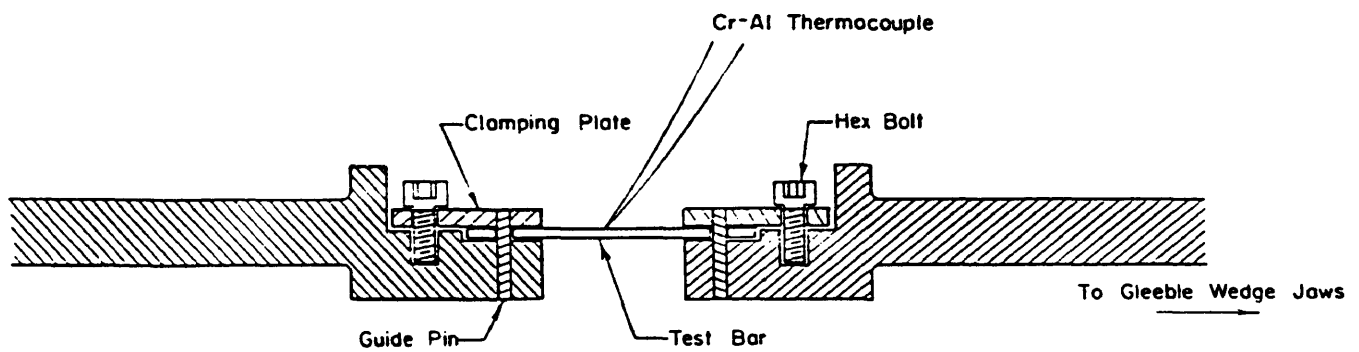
304 stainless steel hot ductility grips used for testing sheet specimens. From Maguire (1).
